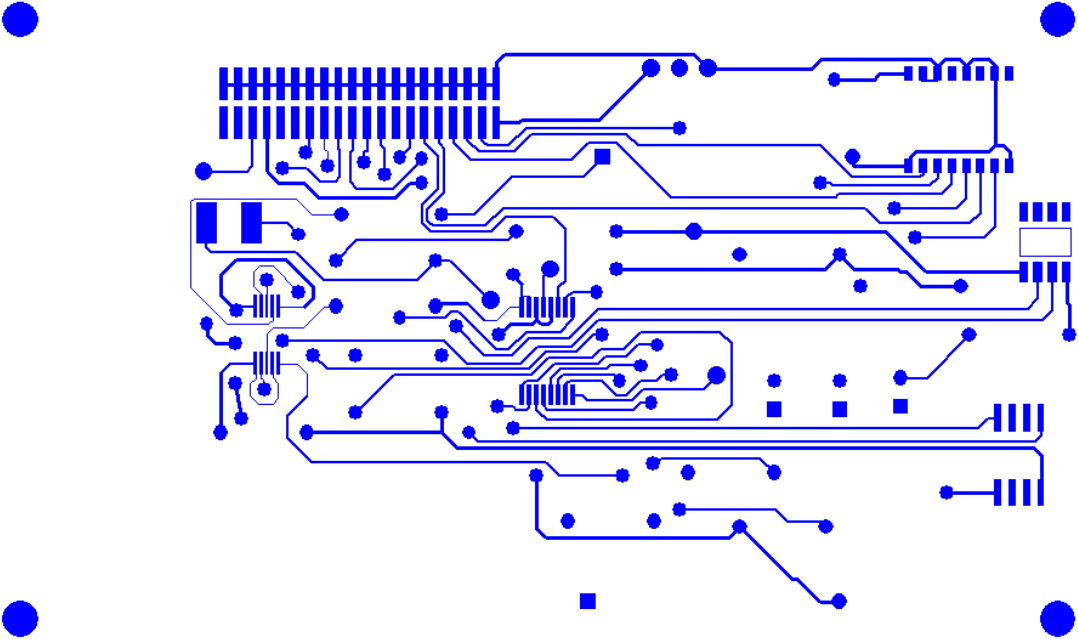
WISENET Add-On Module PCB Layout – Top Layer
